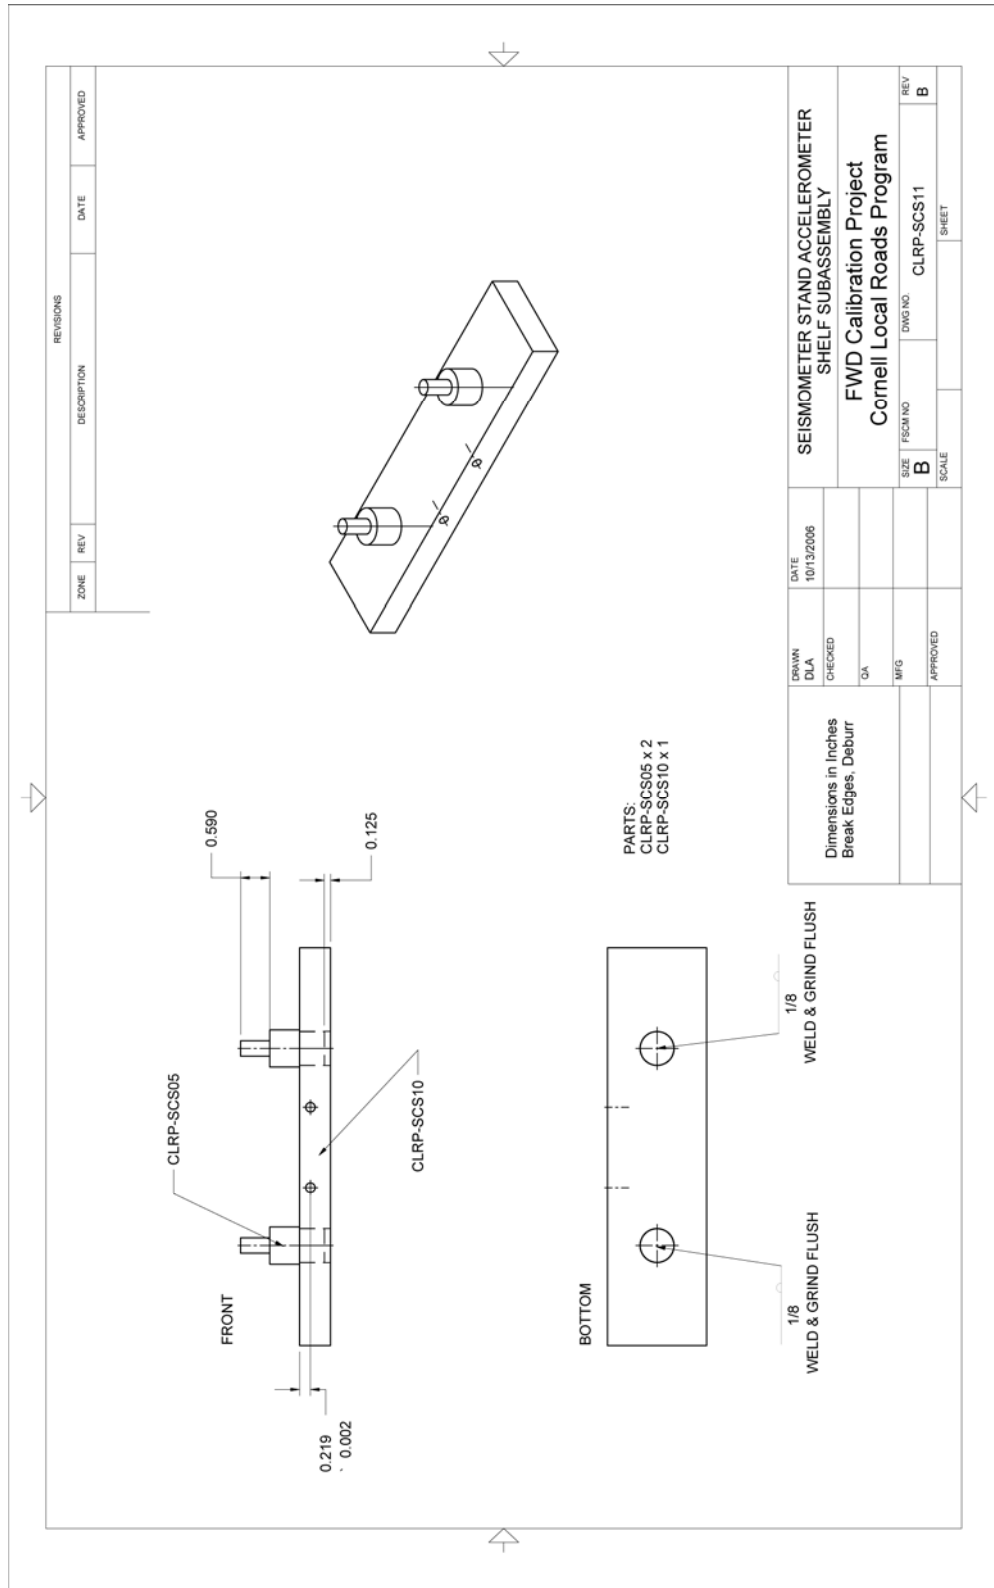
Drawing. CLRP-SCS11 Seismometer Stand Accel. Shelf Subassembly.
